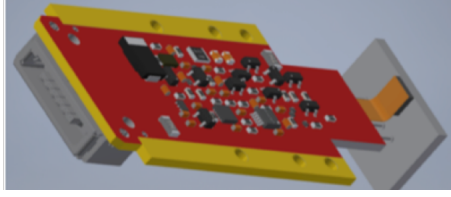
CAD drawing of the the AMP-HV integrated circuit with also a SiPM installed.
